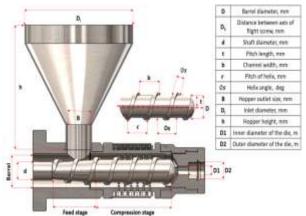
Principle dimensionsof extruder machine design Source: Authors' drawing.
